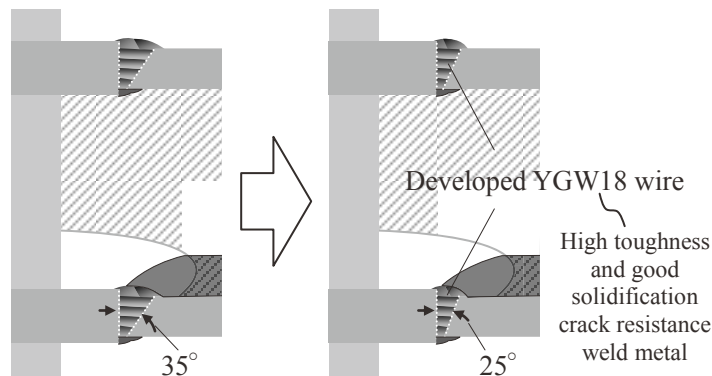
High toughness weld metal by combination with narrow groove and new welding wire has good solidification toughness (Ref. Fig.7.1)
